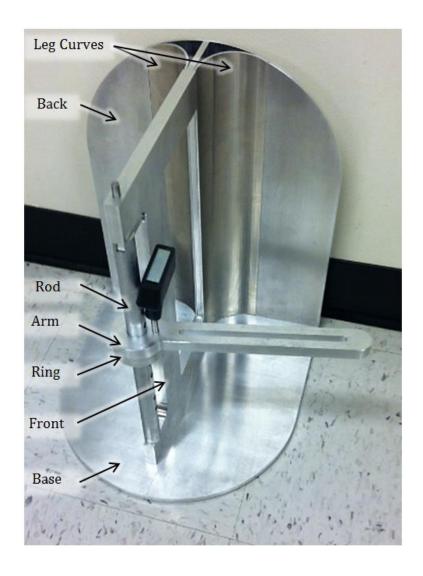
AmP-MeD Frame - Structural and Adjustable Assemblies
